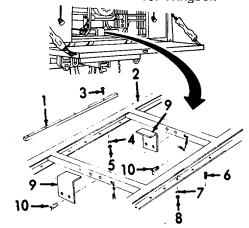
Generator Track and Holddown Assembly, Installation.
